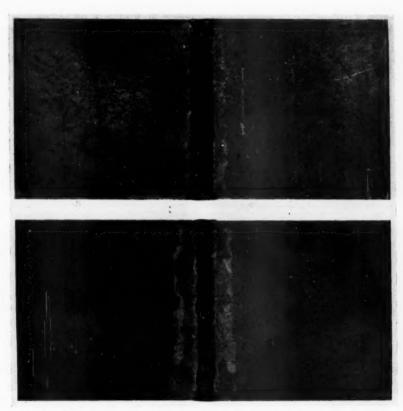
Top and Bottom Surfaces of a Gas-Welded GS11A Aluminum Specimen, 0.25 in. Thick, After Being Exposed to Industrial Atmospheric Conditions for a Six-Month Period.
